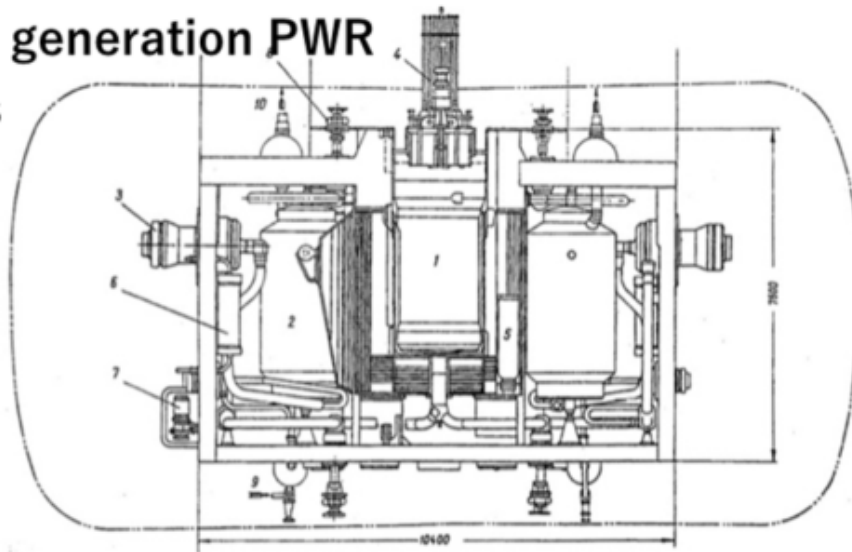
Layout of the OK-150 plant. 1: Reactor, 2: Steam generator, 3: Main circulation pumps, 4: Control rod drives mechanism, 5: Filter, 6: Cooler, 7: Emergency cooling pump, 8: Primary circuit pressure relief valve, 9: Feedwater inlet, 10: Steam outlet (Reistad et. al., 2006).
